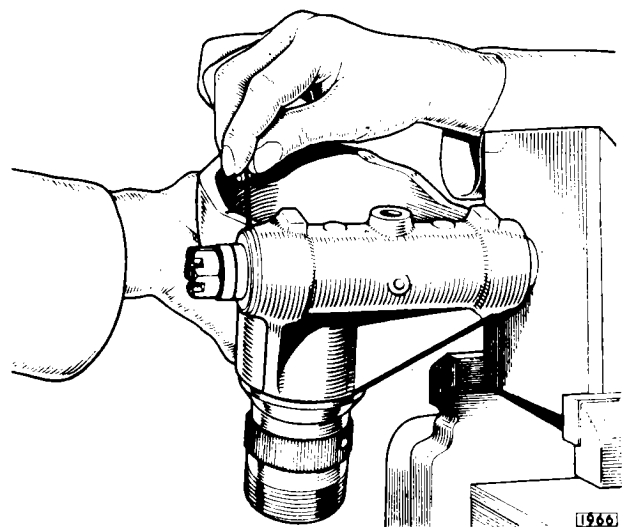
Measuring the amount of clearance between the hub carrier and large washer to determine the end float in the bearings
